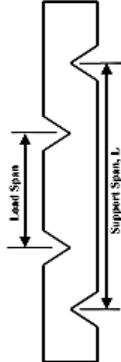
Fixture Used to Align Loading Noses and Supports
